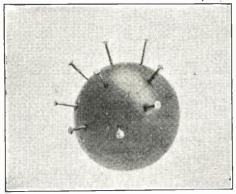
Method of Fitting the Rubber Ball For the Shaft and the Rotor Coil Windings.
